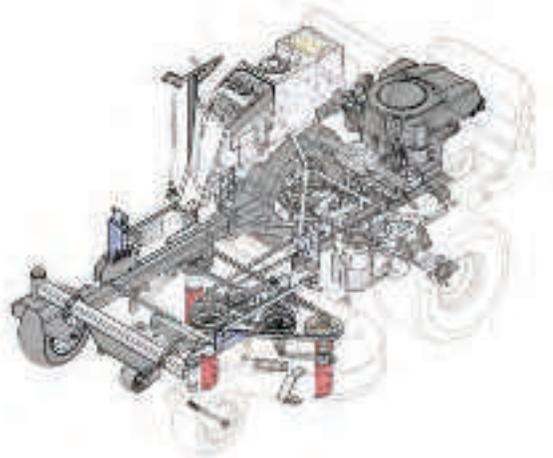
Solid Edge can produce a complete digital design complete with sheet metal, machined and supplier components as well as frames, wiring, and tubing designs. (Model image courtesy of the Magic Circle Corporation)
